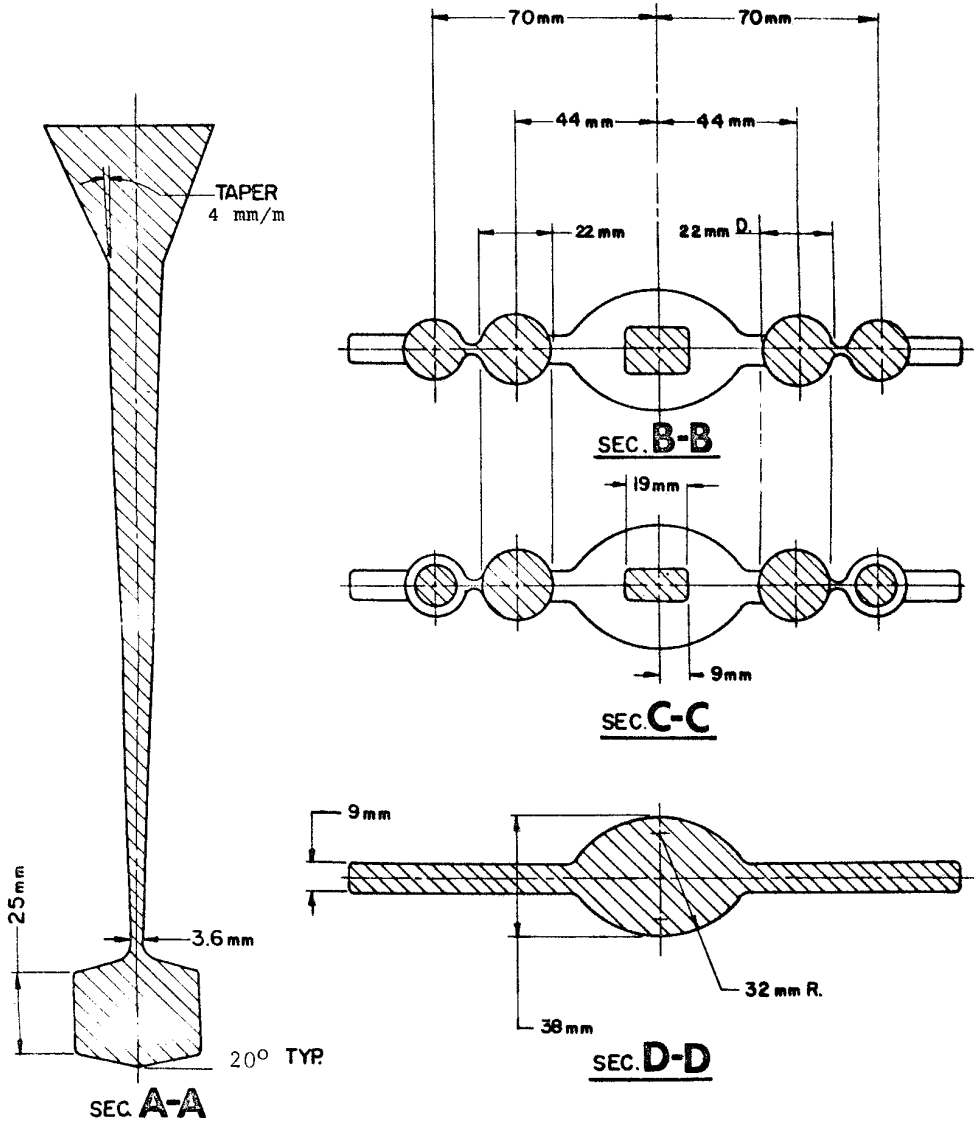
Tension Test Specimen Casting Cross Section – [Metric]
